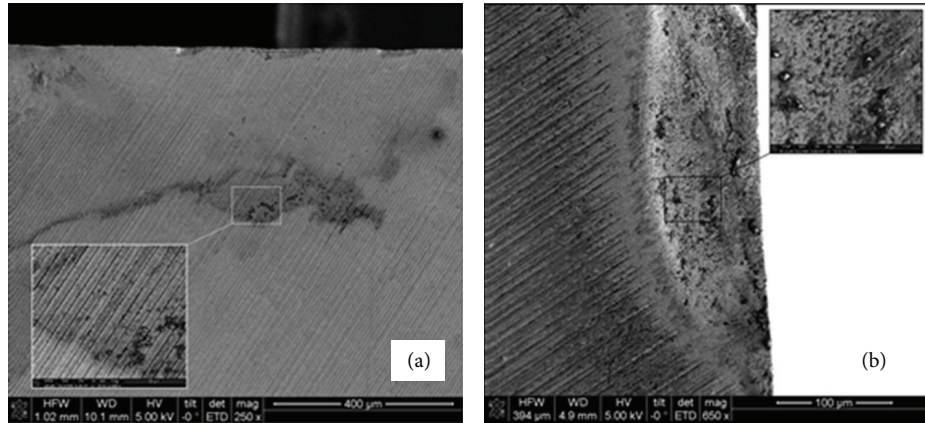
SEM micrograph of tool for treatment at 36 m/min and 0.25 mm/rev showing welded microchips. (a) Rake and (b) flank.
